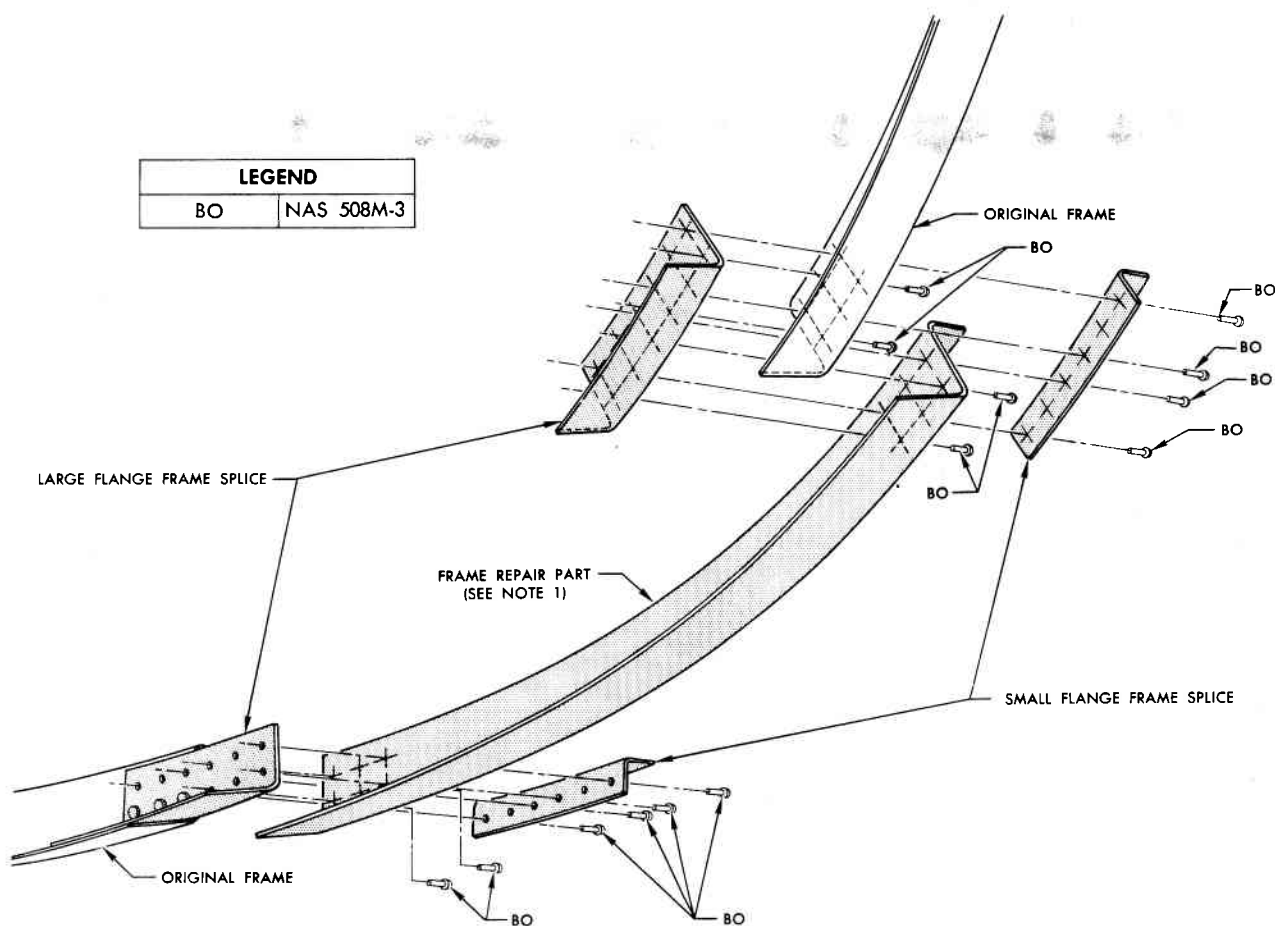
Damaged Tail Cone Repair (Sheet 1 of 4)
